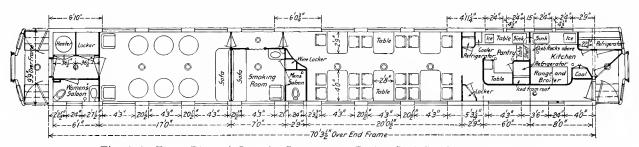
Floor Plan of Ontario Government Parlor-Café Car Shown in Fig. 179.
